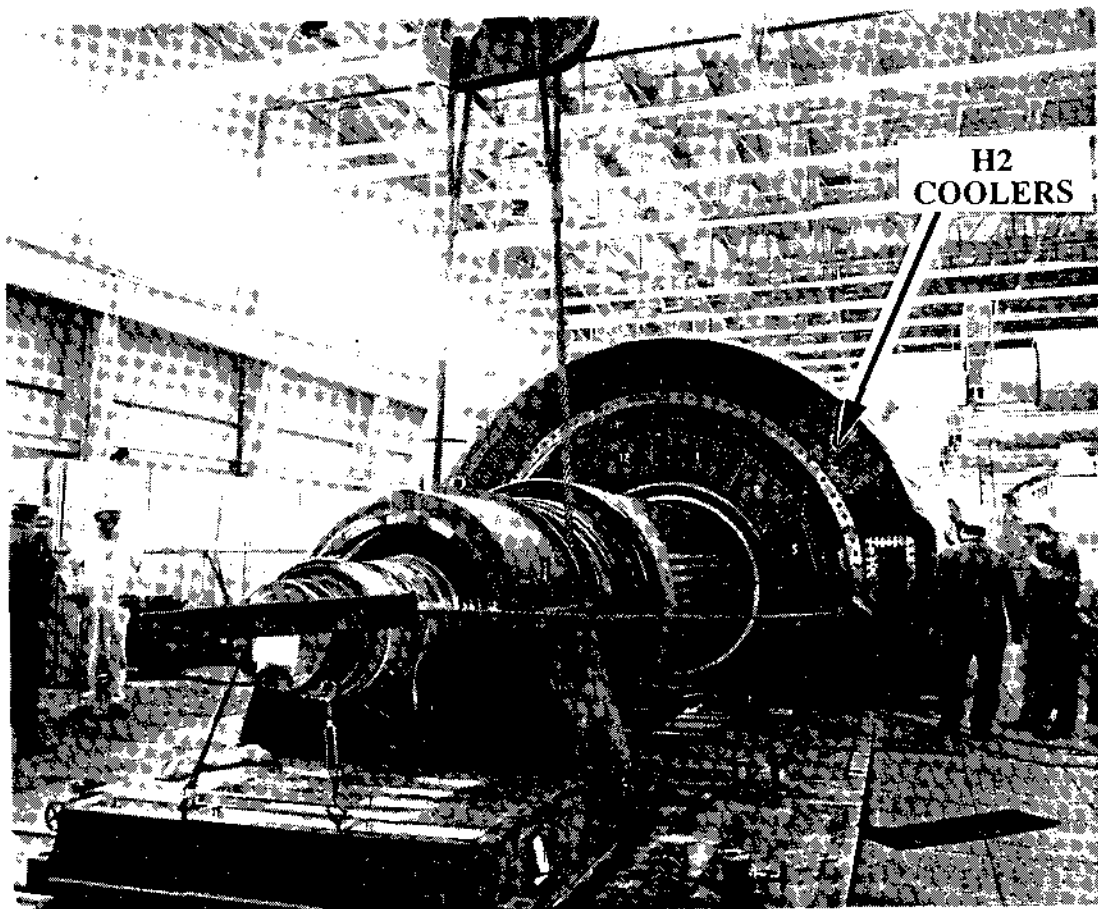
Rotor Being Inserted into Yoke/Armature Assembly
